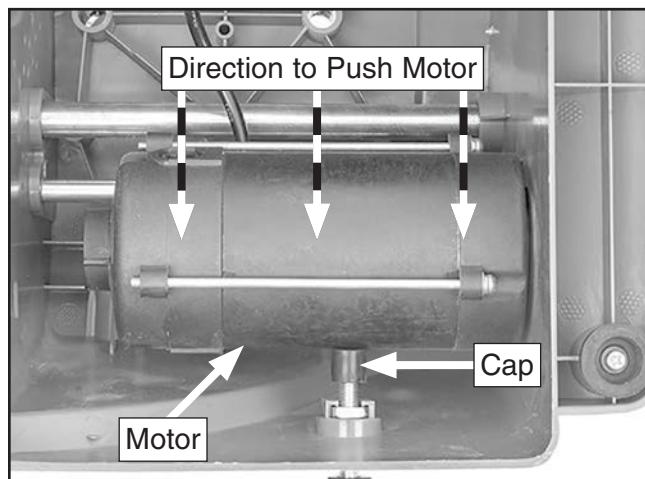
Torque adjustment knob tightened so cap contacts motor.
